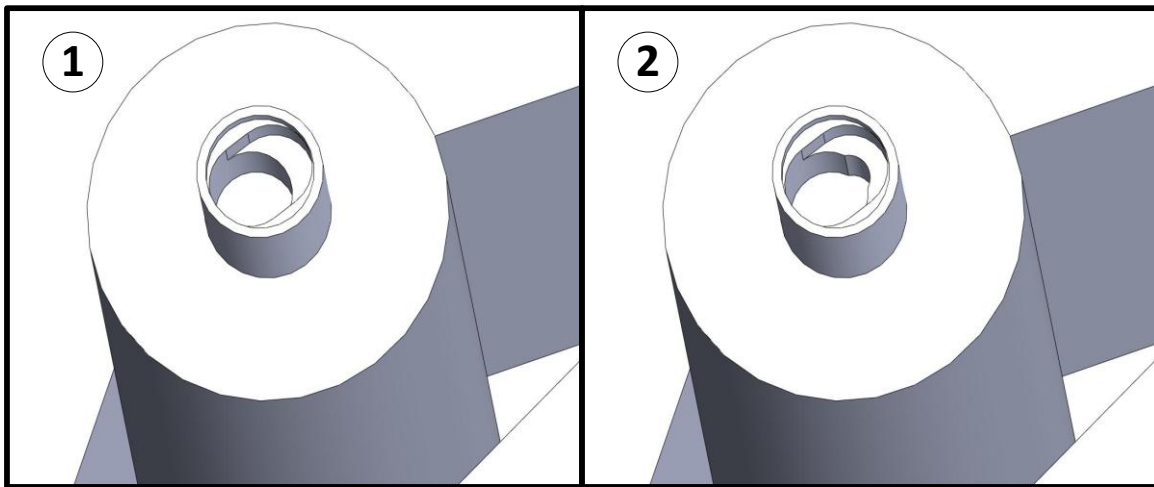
(1) A 4.5mm diameter hole is milled into the part. (2) A 1.2mm radius is milled into the part.
